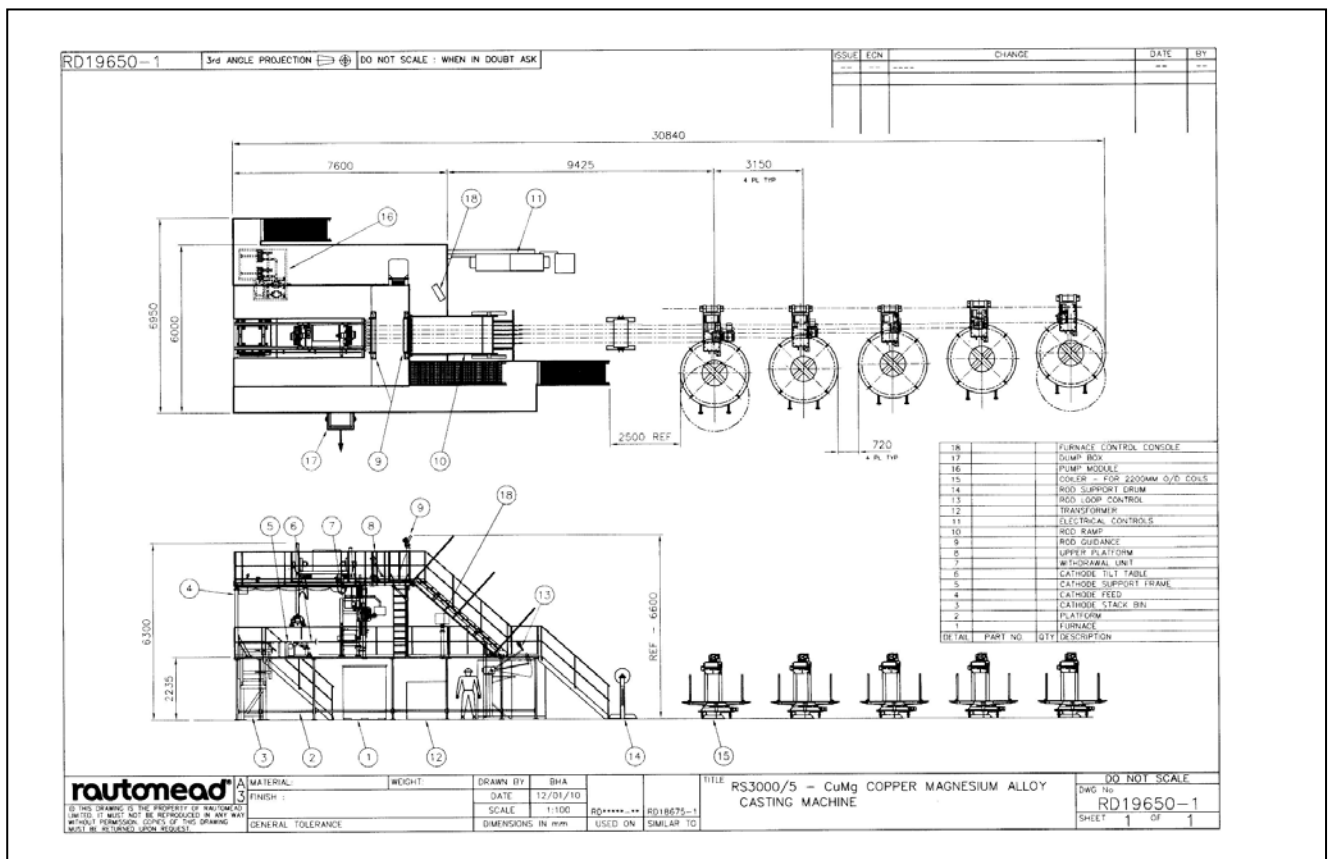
Rautomead RS 3000/5-Cu-Mg Casting Machine Layout
